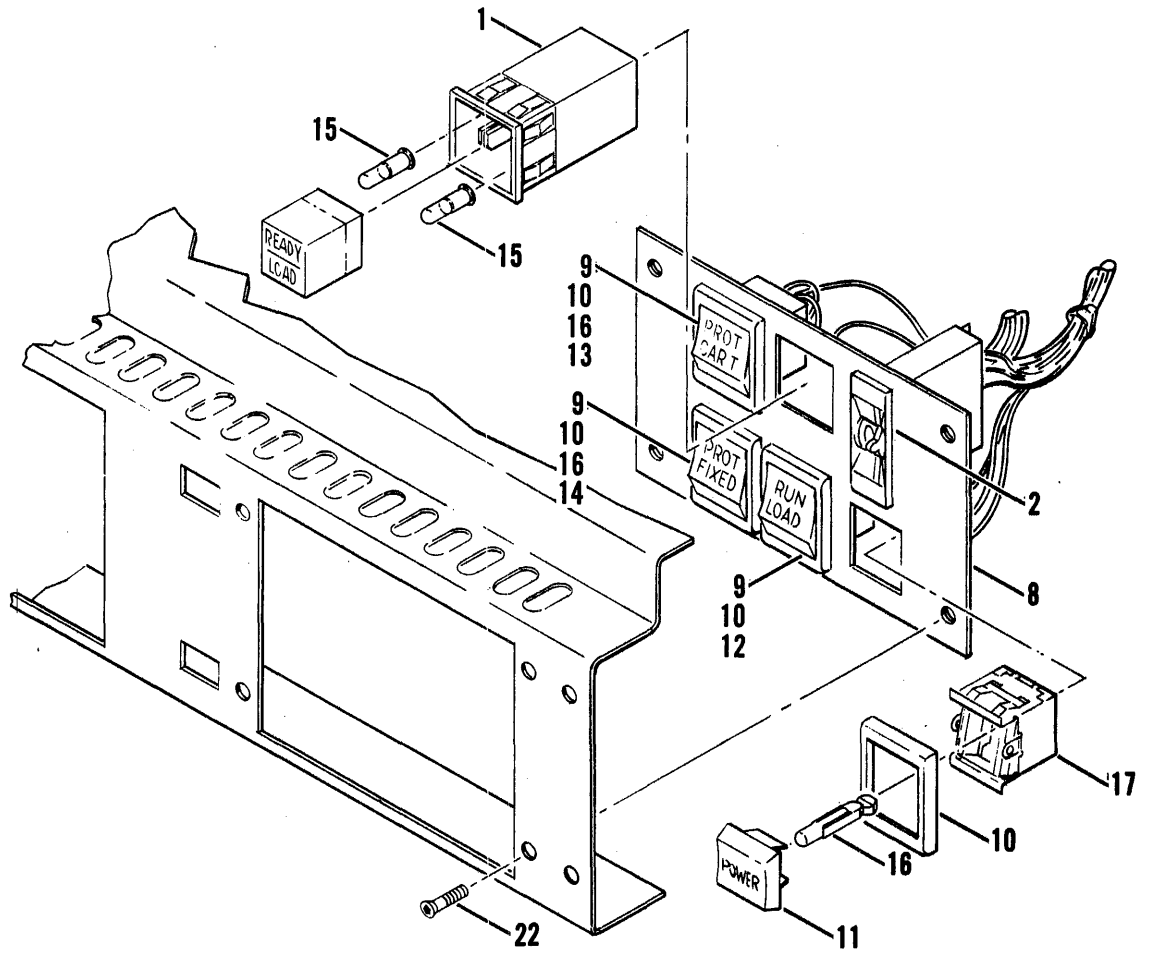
100/200 TPI Disc Drive Operator Control Panel
